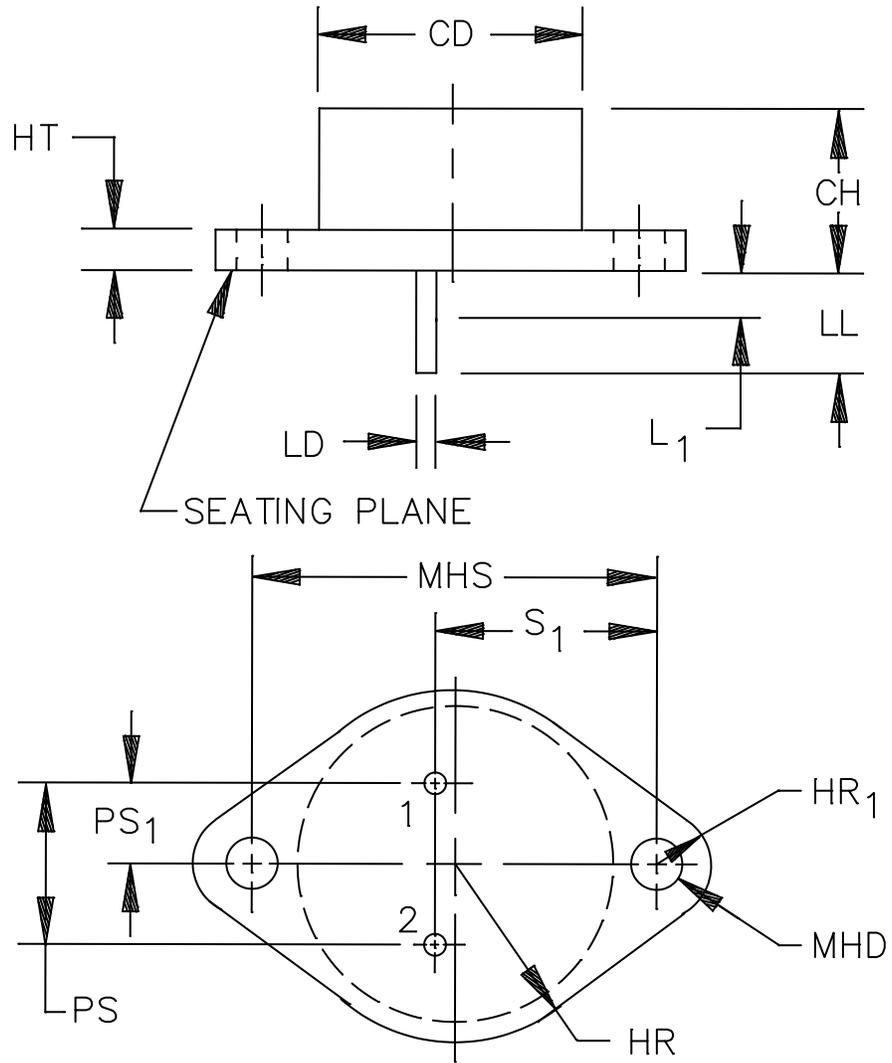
Physical dimensions (TO-204AA, formerly TO-3).
